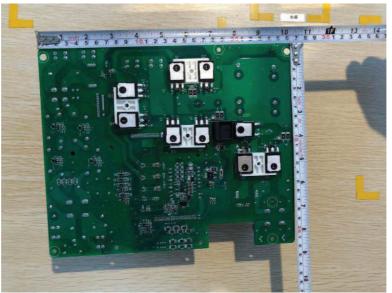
Solder side view of Main board for model: EA2KSI, EA2.5KSI, EA3KSI
